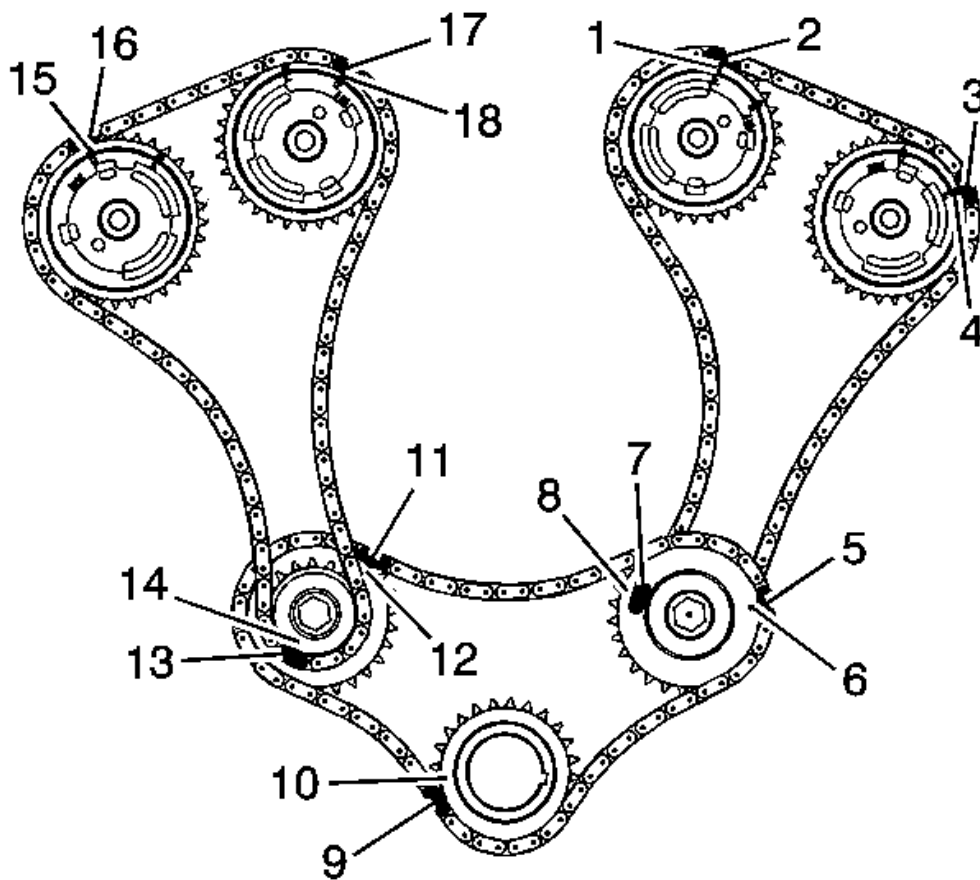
Identifying Timing Chain Marks & Locations On Gears, Sprockets & Actuators
